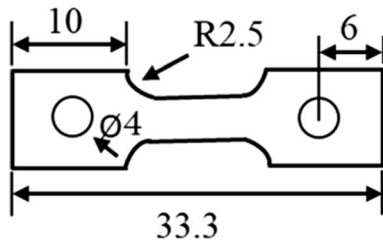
The tensile specimen illustration (dimensions are in mm)
